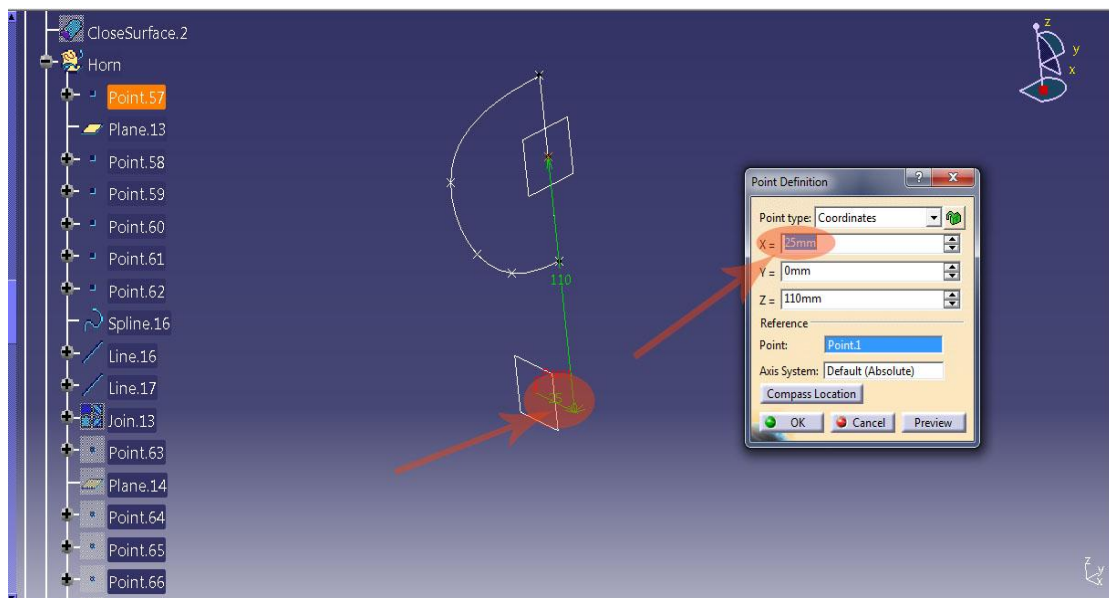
First symmetrical external surface for the steering wheel.
